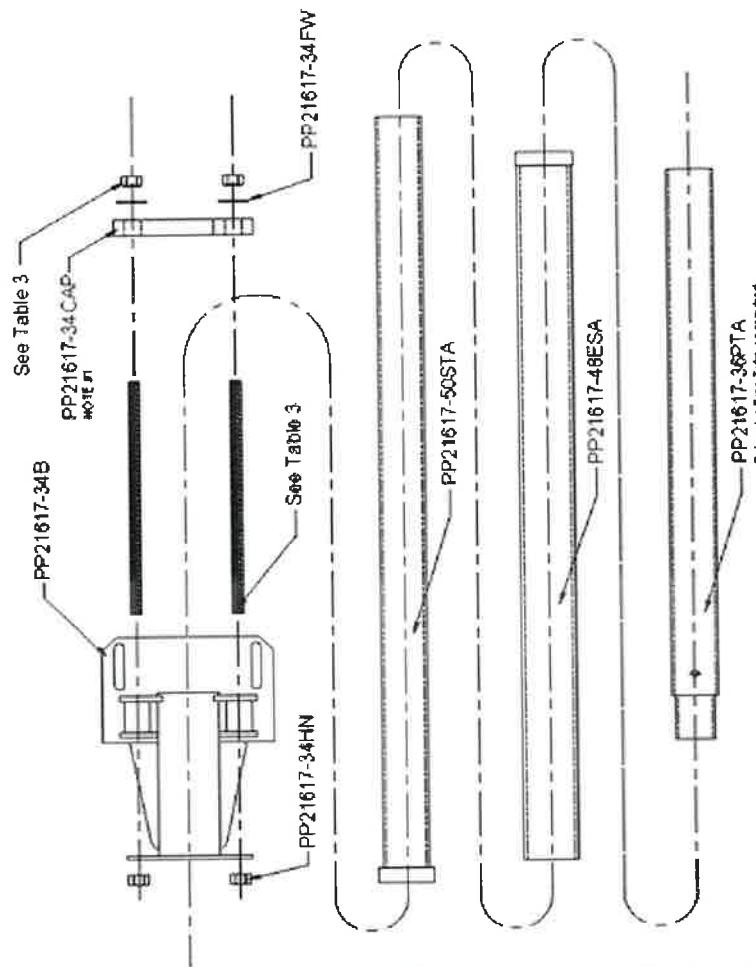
(Continued) —PP21617-34 BRACKET ASSEMBLY
